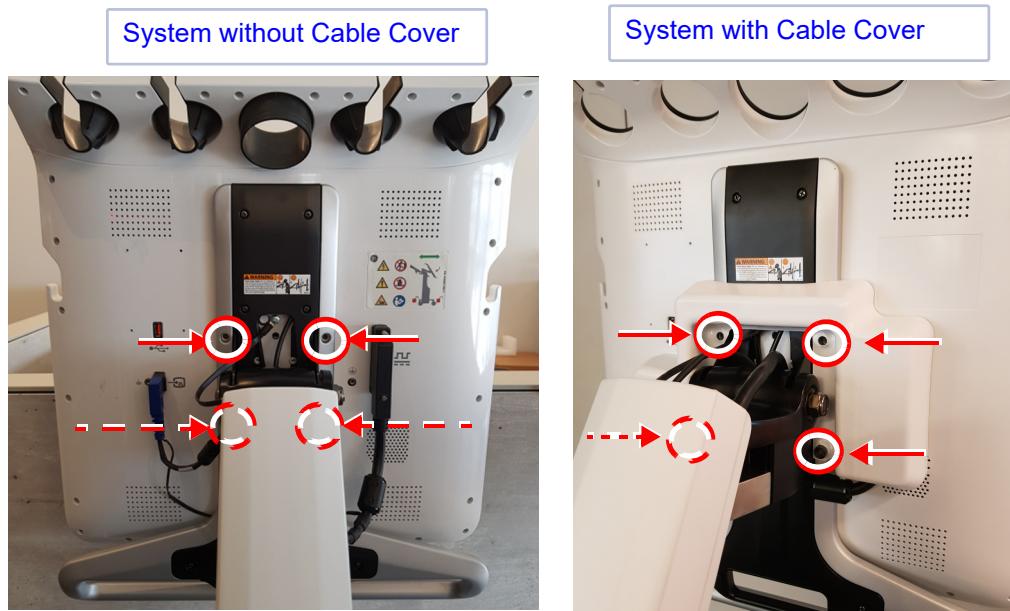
Cockpit (Monitor) Securing Screws and Cockpit Rear Cover Removal
